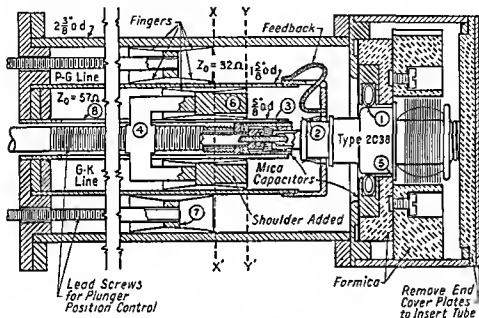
Concentric-cavity type of coaxial-line oscillator. (1) Plate contact; (2) grid contact; (3) cathode contact, (4) nut and yoke driving grid-cathode plunger through slots in the cathode line; (5) tube stop properly to position tube in oscillator; (6) grid-cathode plunger; (7) grid-plate plunger; (8) slot in cathode line.
